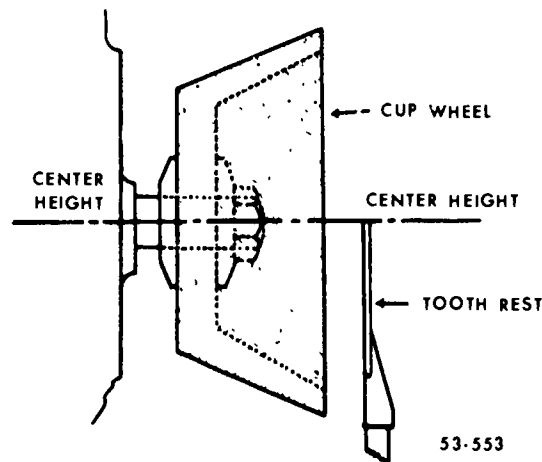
Alignment of tooth rest with axis of cup wheel
